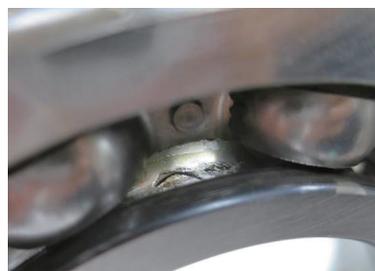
Damaged bearing unit, disassembled from the anti-coupling side of the motor unit.
